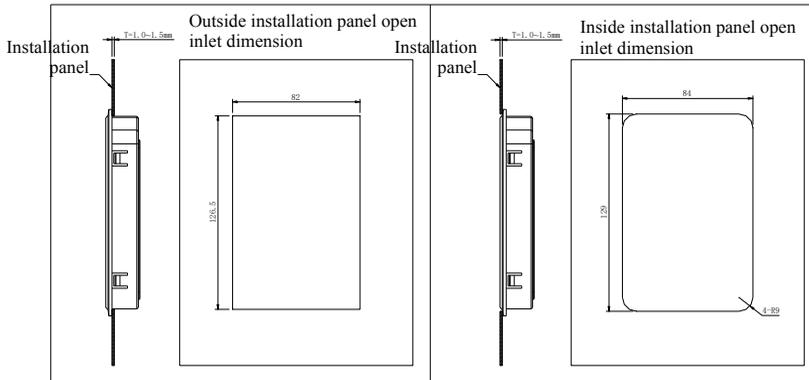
ST500 Keypad Installation Open Inlet Dimensions (in mm)
